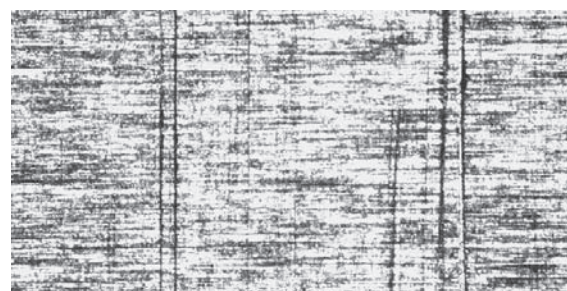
A view of a fragment of die insert surface after fabrication of a single stamping
